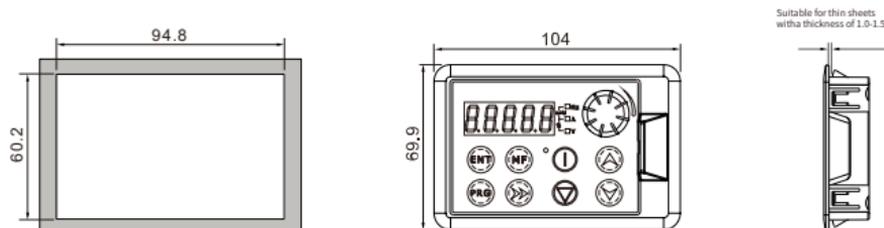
Mounting dimensions of keypad foot (unit: mm)
